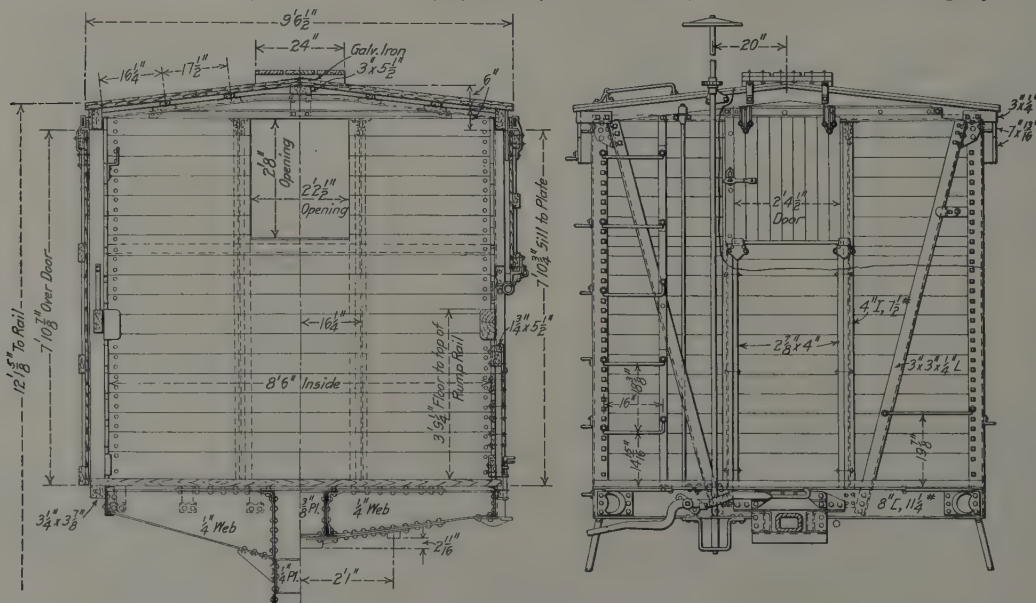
Cross Sections and End Elevation of Missouri Pacific Steel Frame Stock Car Shown in Fig. 201.
